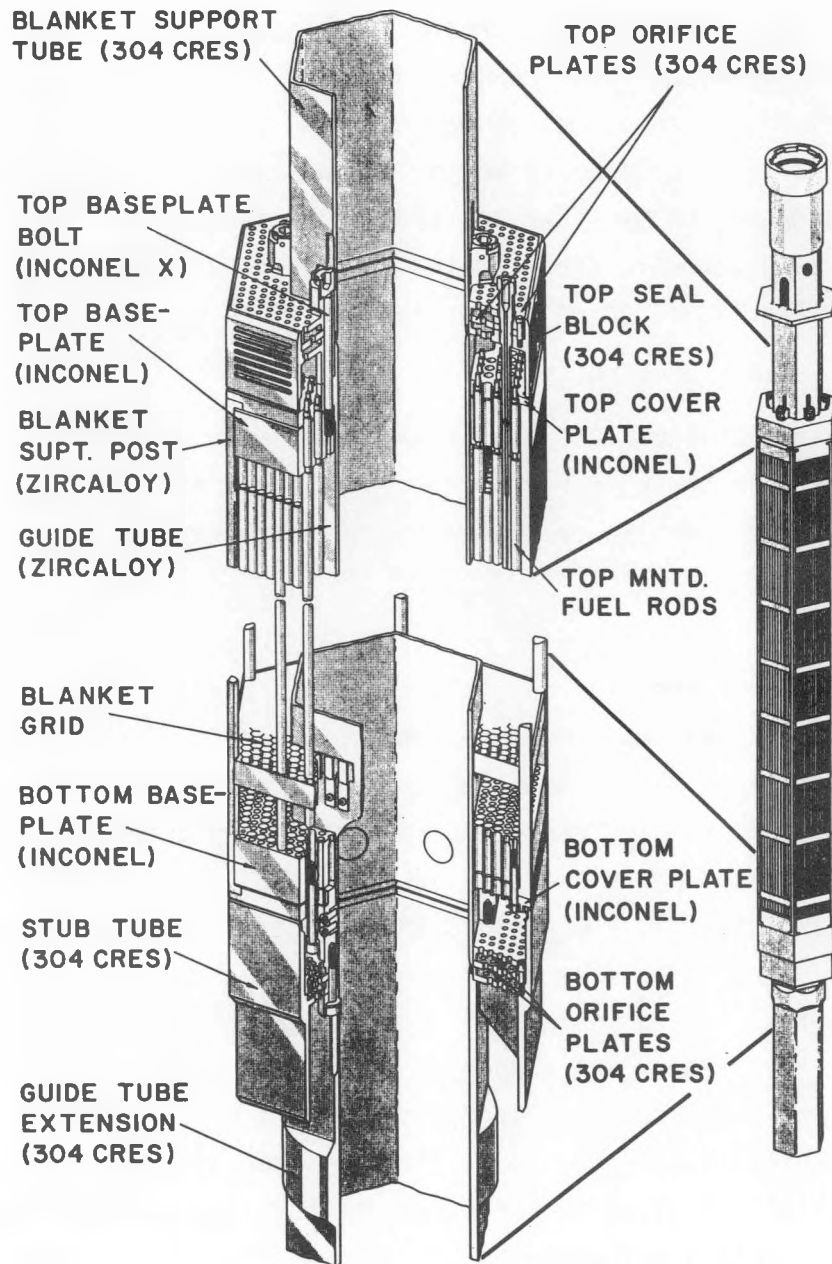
LWBR Type I Blanket Fuel Module Assembly
